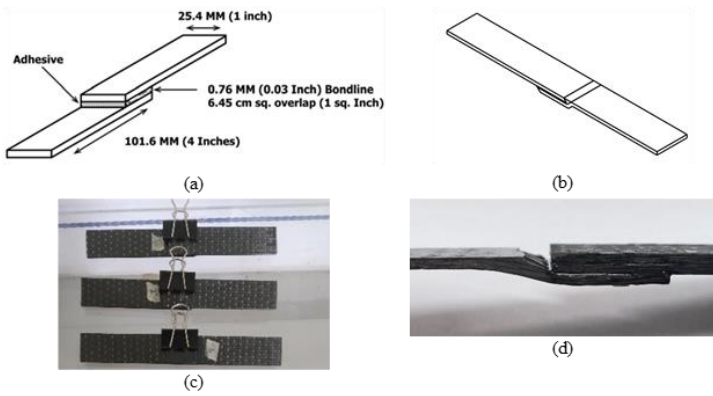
(a) Single lap composite joint design, (b) joggle lap joint design, (c) bonding of single lap joint specimen, and (d) joggle lap joint specimen.
